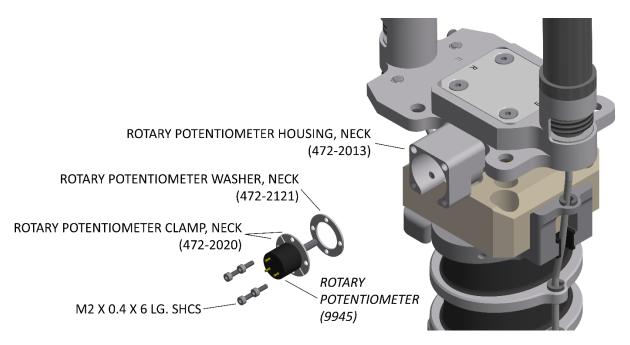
Mounting the Rotary Potentiometer Housing, Neck
